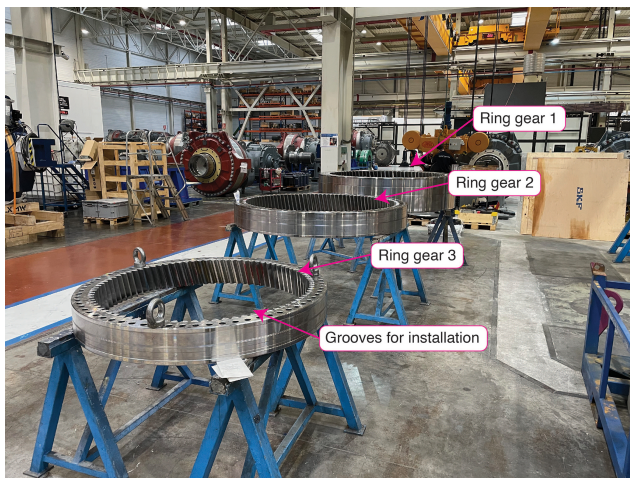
All three ring gears with machined grooves ready for sensor installation.
